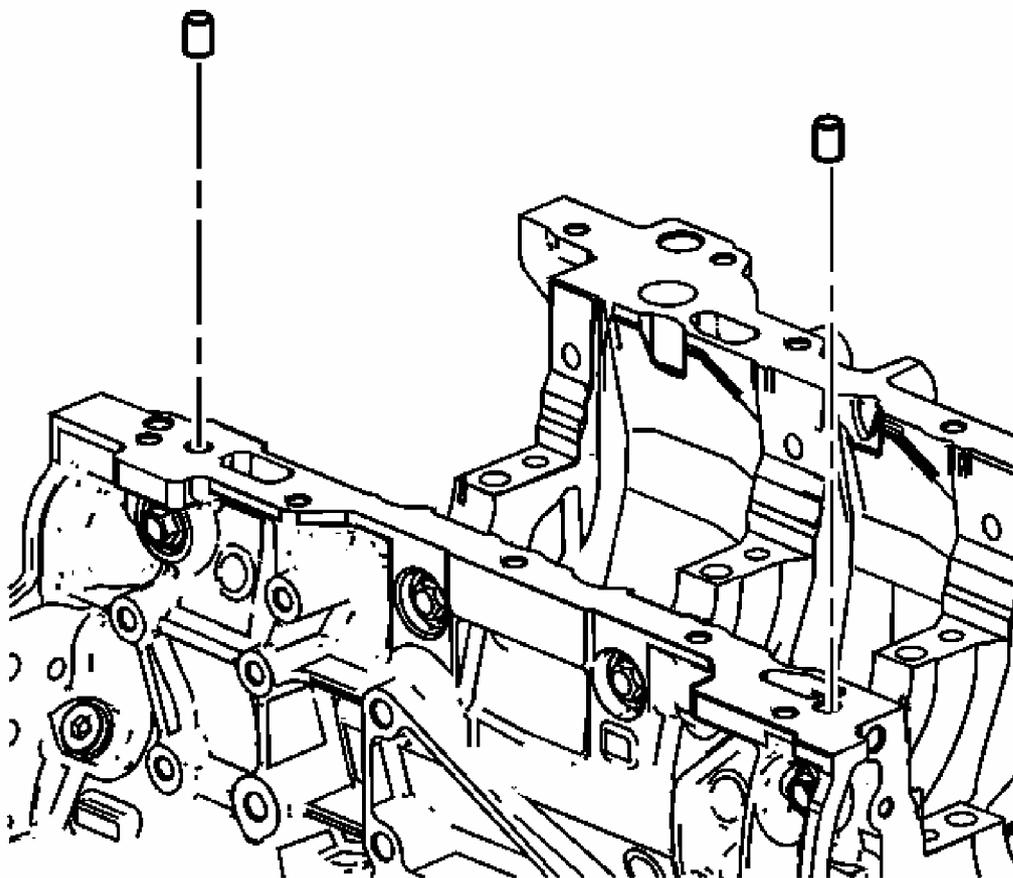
Cylinder Block-To-Oil Pan Alignment Dowels
